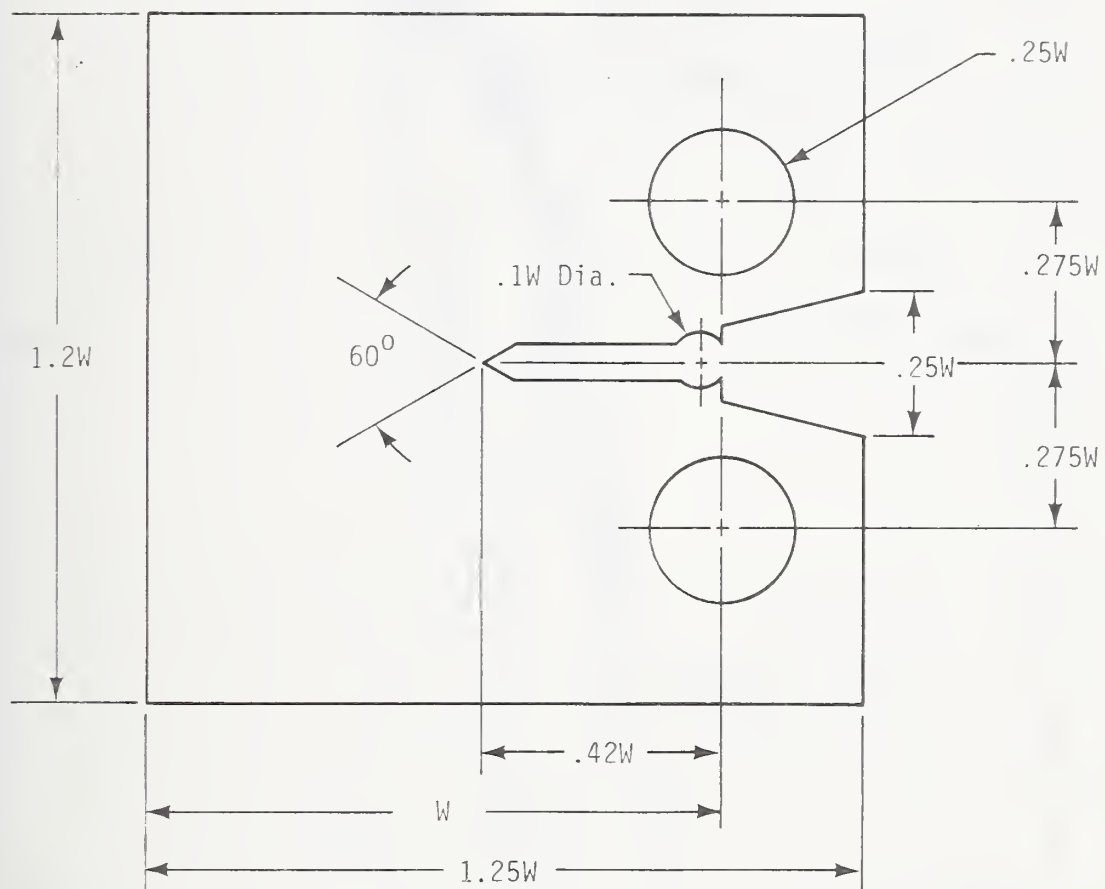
Compact specimen used in fatigue and fracture tests (thickness,  $B = 3.17$  cm; dimensions are in cm).
